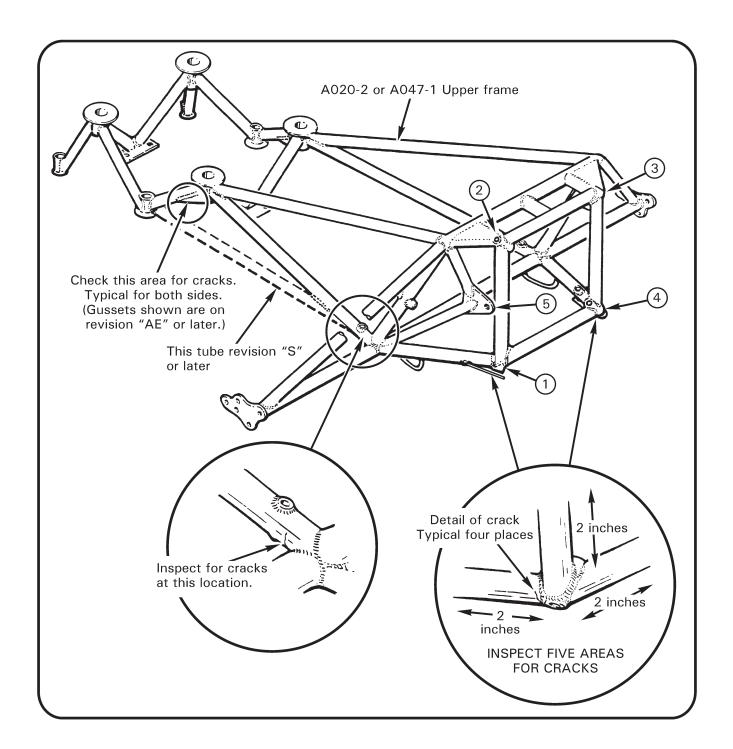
UPPER FRAME CRACK INSPECTION
